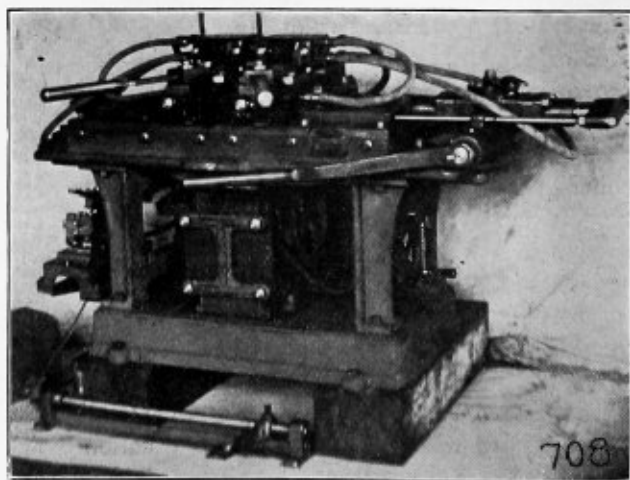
Thomson Electric Resistance Tube-Welding Machine
